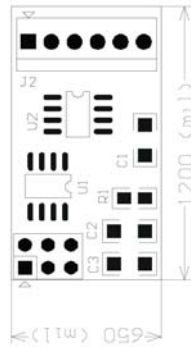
SSQE-ADDON Board Mounting Hole Outline
